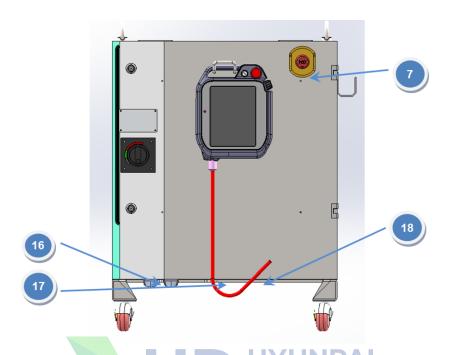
Placement of Parts on the Front Exterior of the Hi6-S30/S50-A0 Controller
